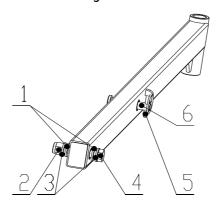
Wheel Frame Weldment and Fittings
